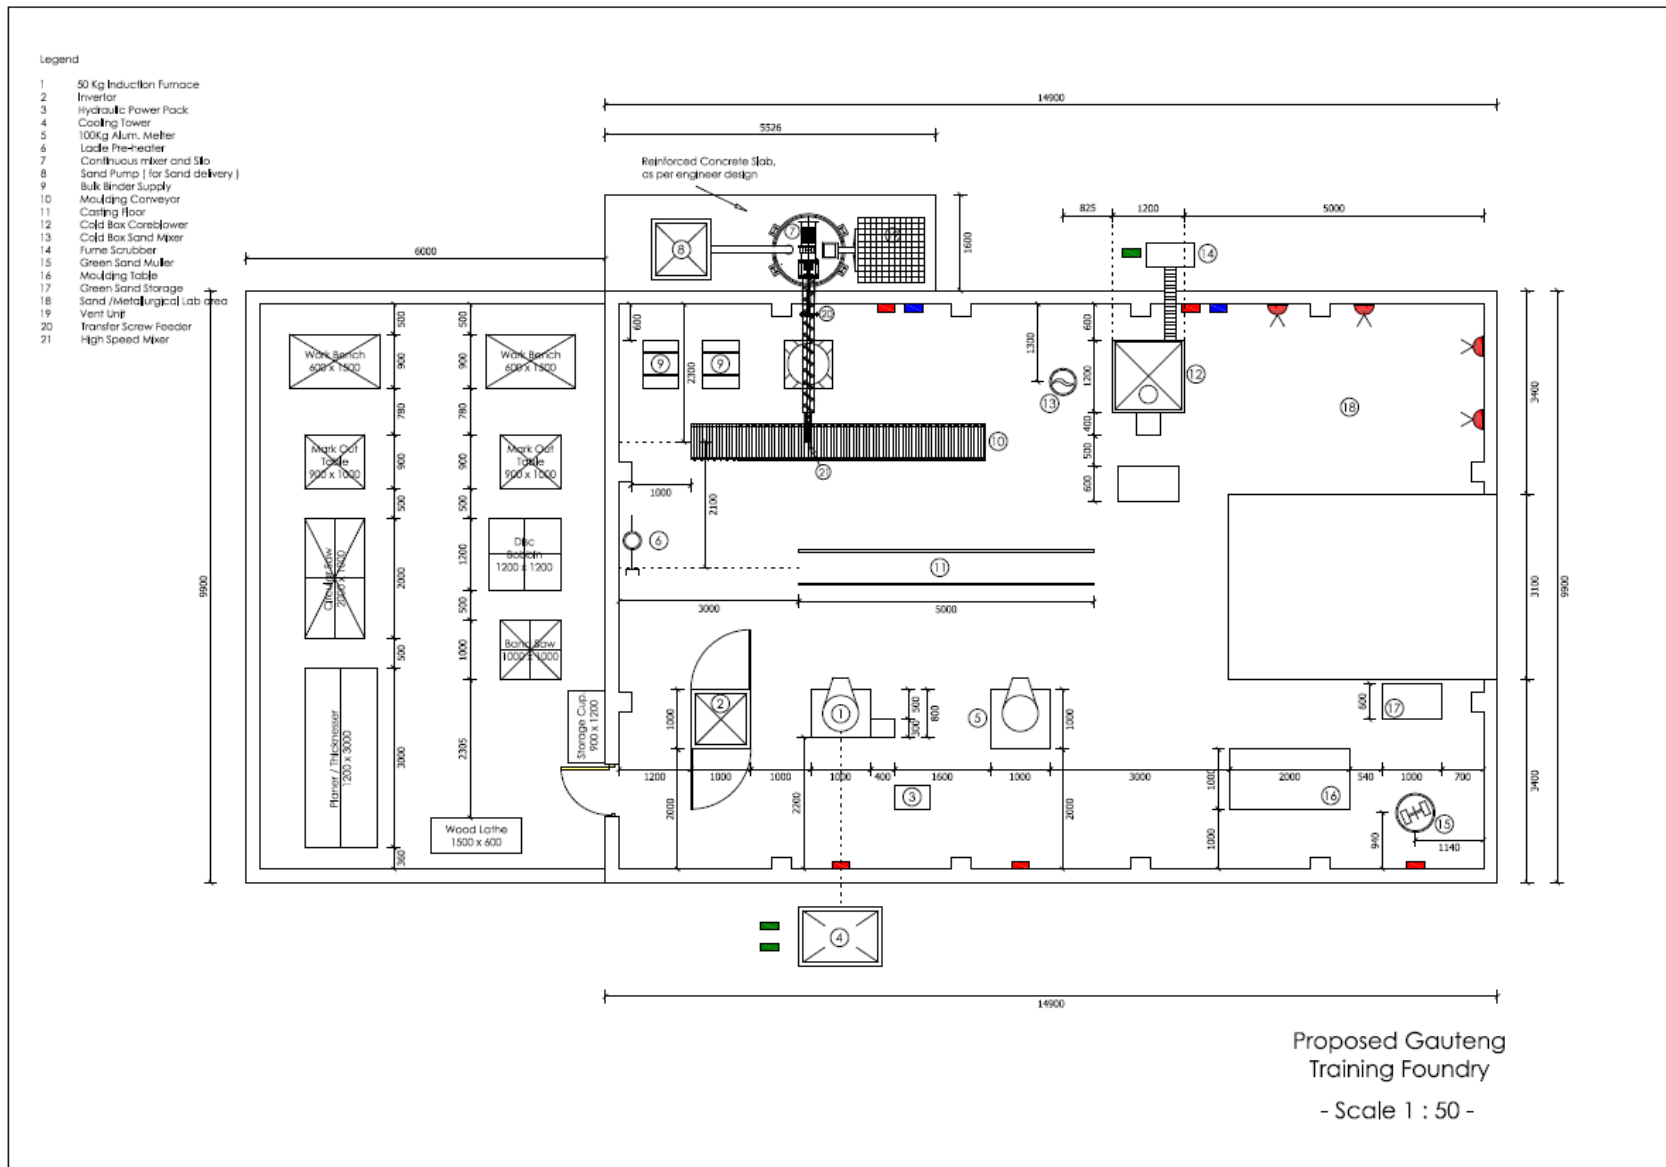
Concept layout for proposed foundry training centre at EEC, Kwa-Thema campus.
